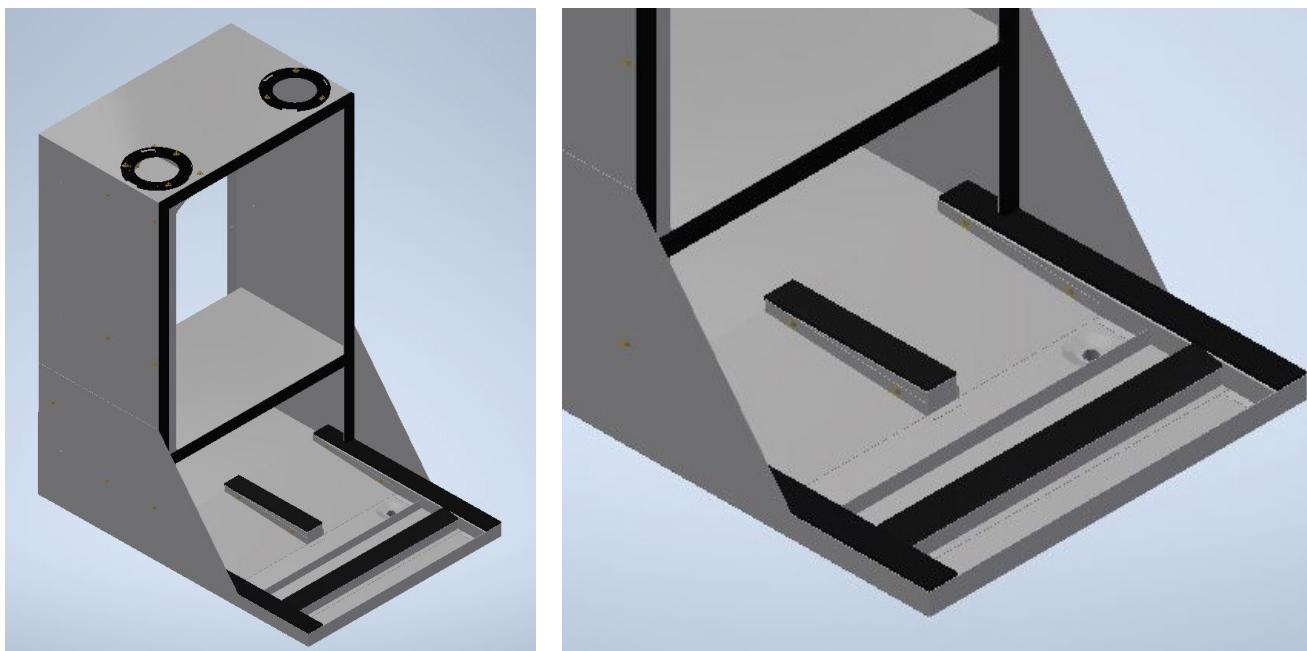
WALL SLEEVE CONDENSATE DRAIN
